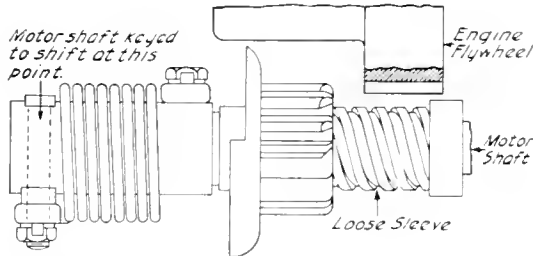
Spring Drive Automatic Shift (Inboard Shift)
